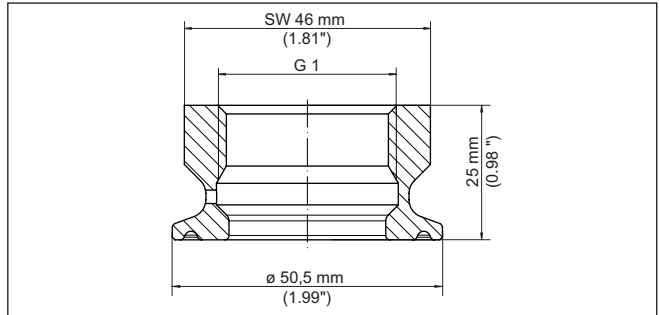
Dimensions hygienic adapter G1 (DIN 3852-X) on Clamp 1½" (DIN 32676, ISO 2852) PN 40 - O-ring seal
